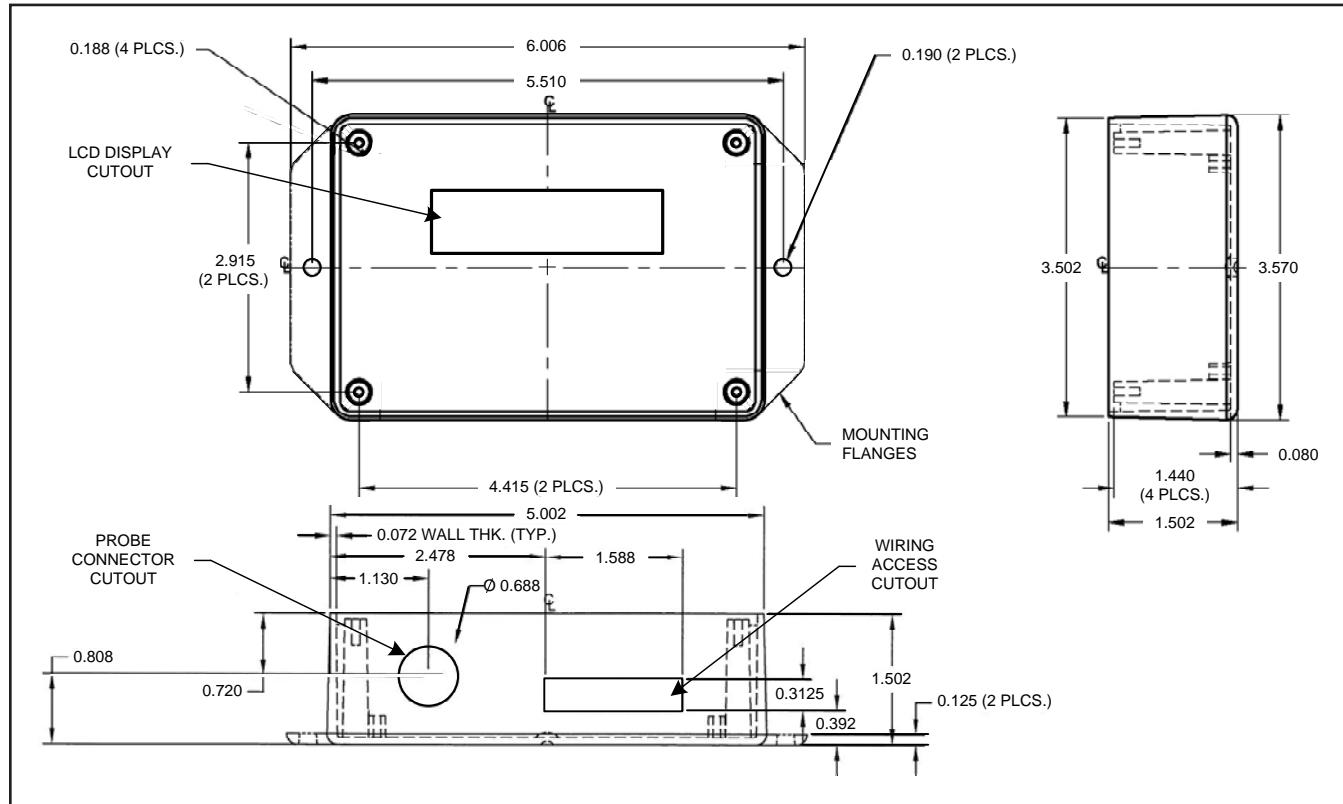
GF-1200-A Transmitter Mechanical Detail Drawing
